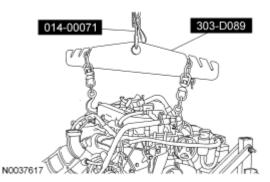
Identifying Special Tools (014-00071, 303-D089) Courtesy of FORD MOTOR CO.
